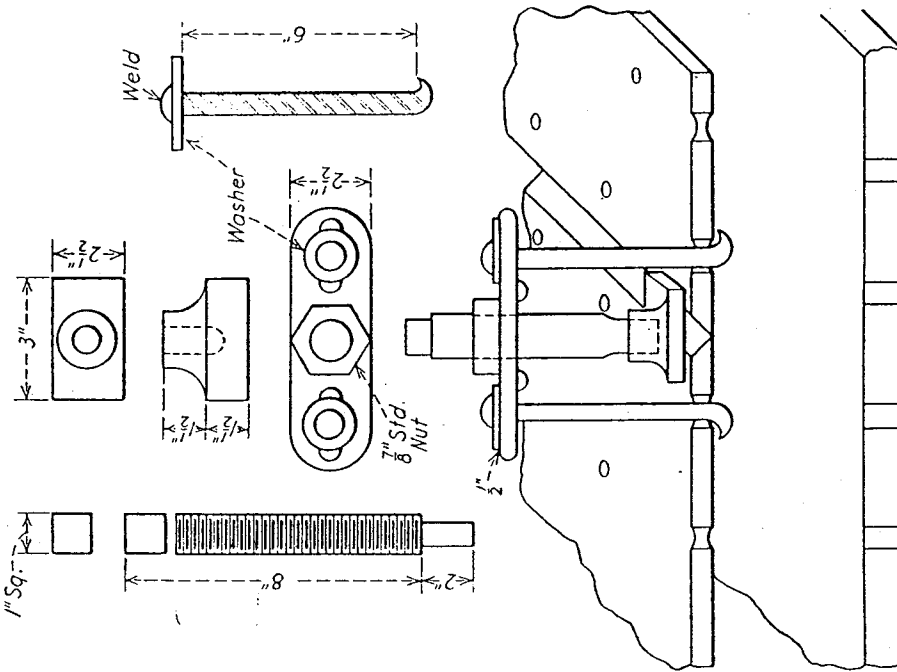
Tool used to line up a sheet ready for welding
